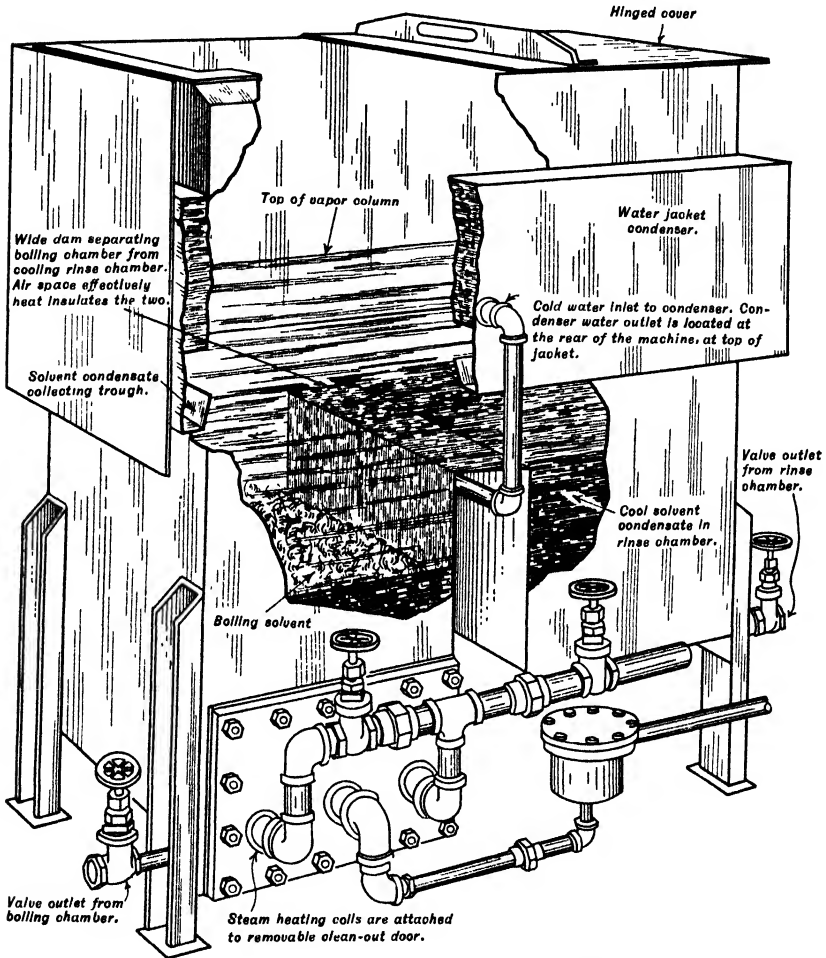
Sectional view of a vapor-phase degreasing machine.
